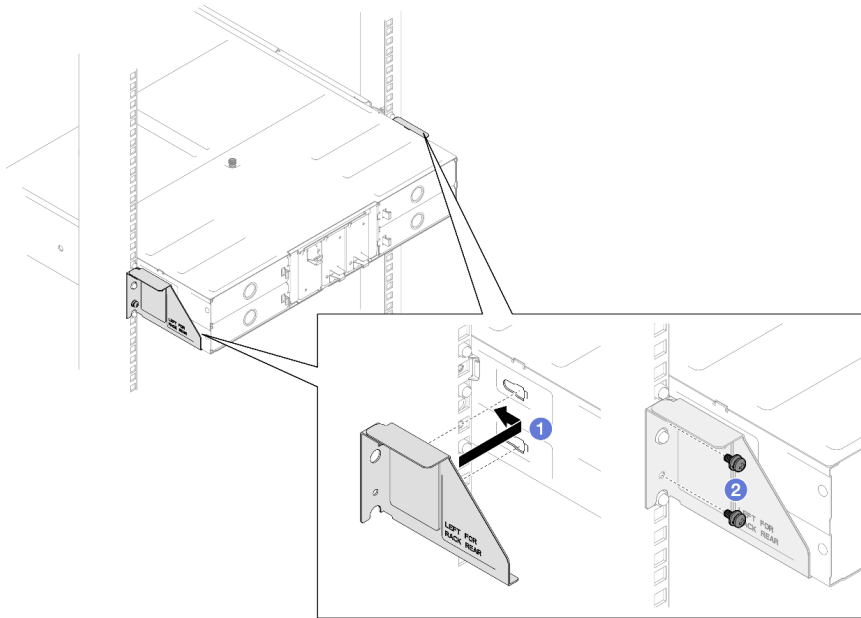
Installation of shipping brackets for 29-inch or 28.31-inch deep racks
